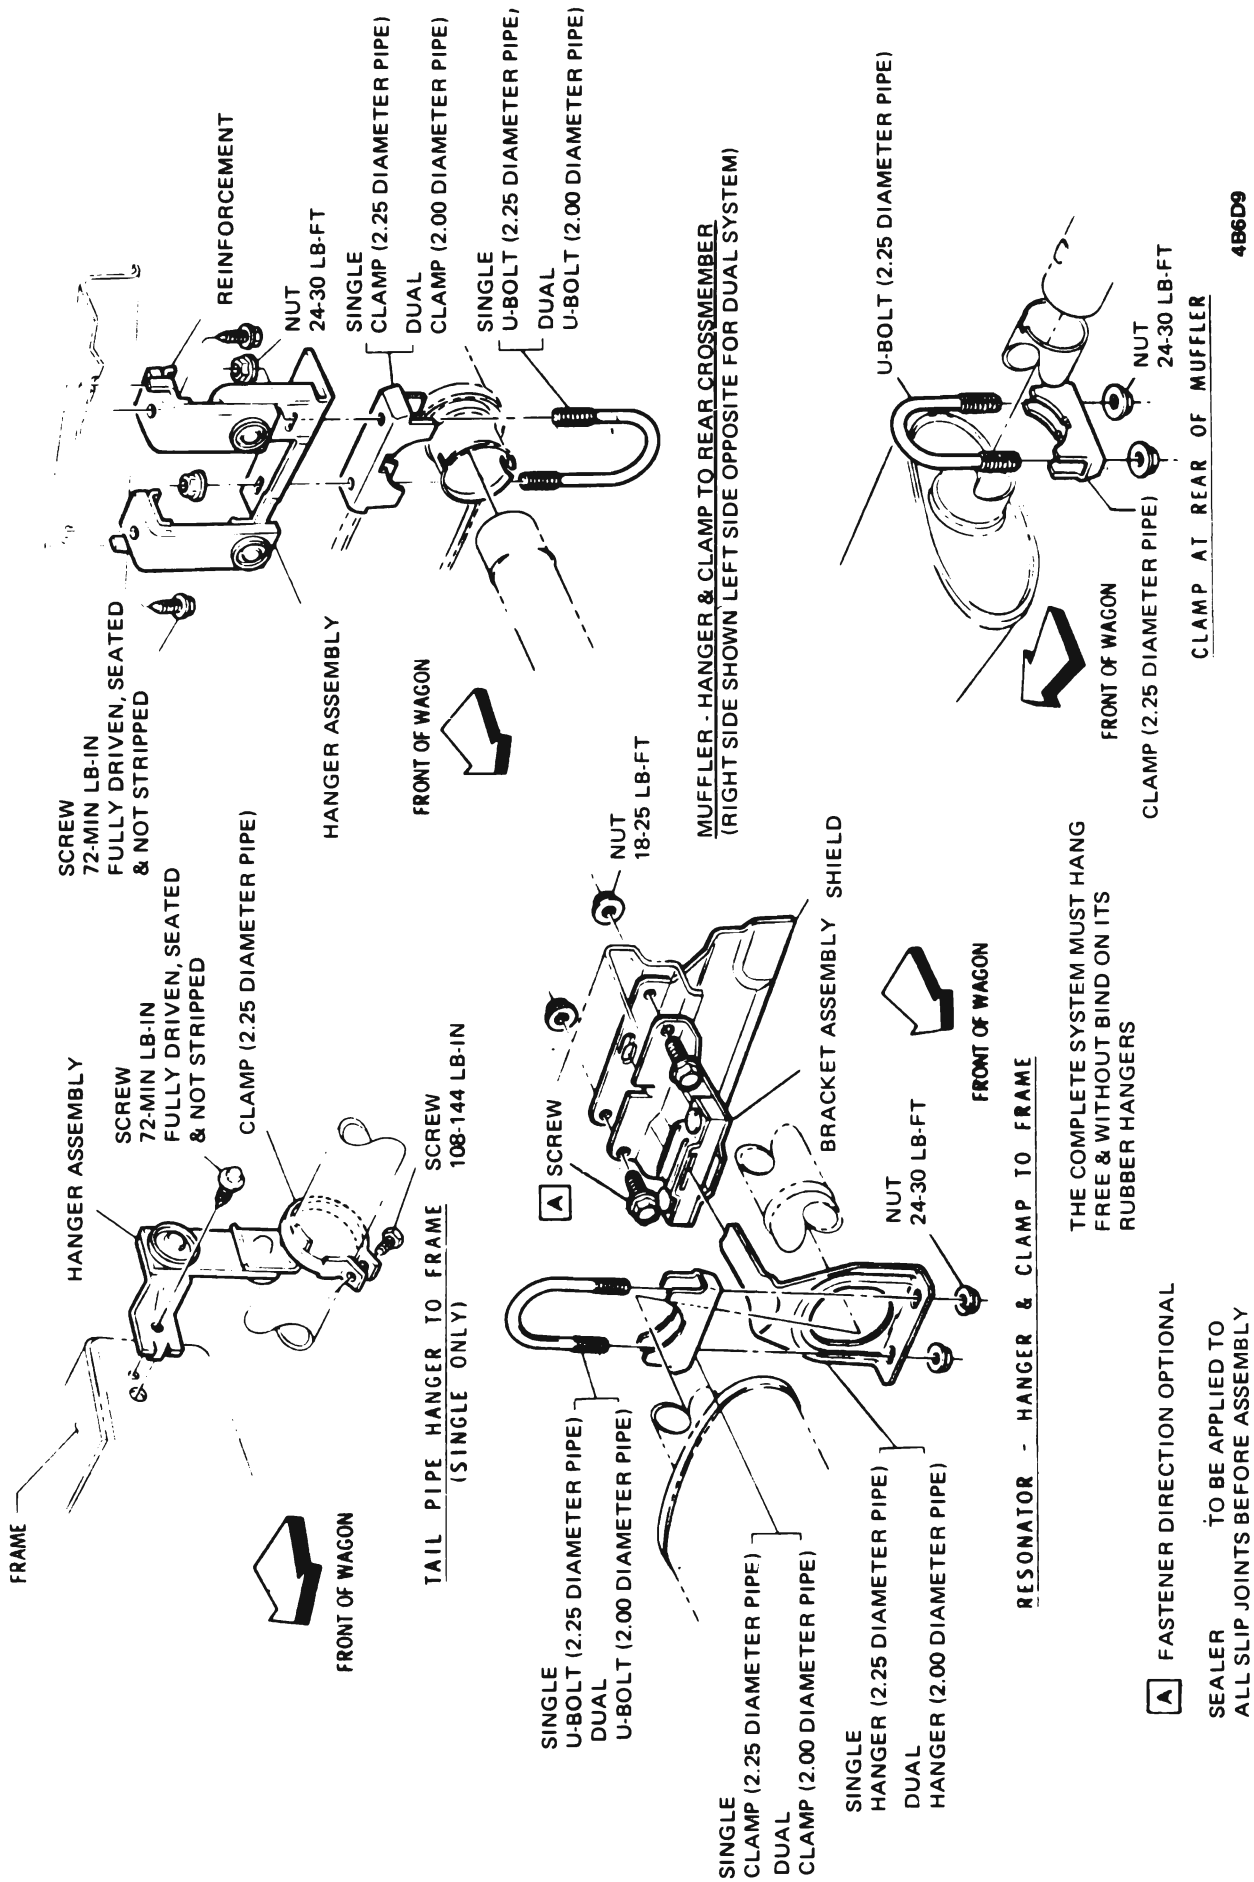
D-9 "B" Series Exhaust System Attaching Parts (Wagons)
